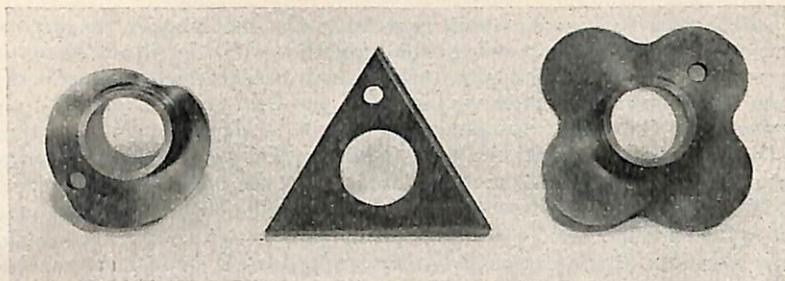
Examples of Flat Cams milled on a Punched-tape controlled Machine
